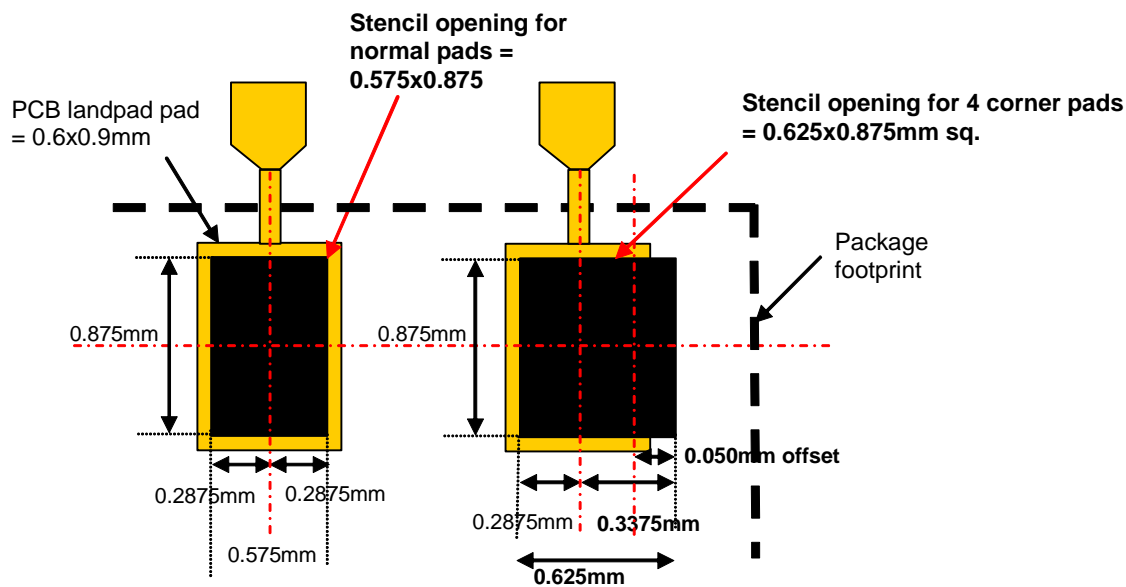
Stencil Design Guidelines (detailed dimensions for corner pads)
